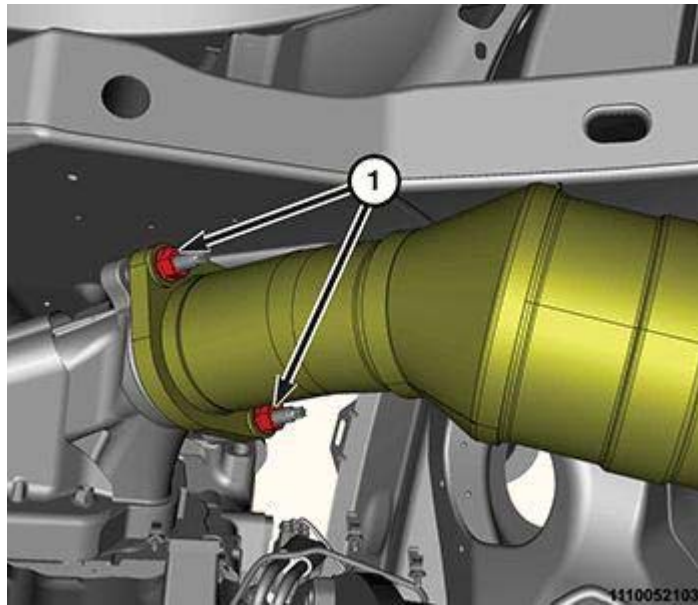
Catalytic Converter To Manifold Flange Nuts
